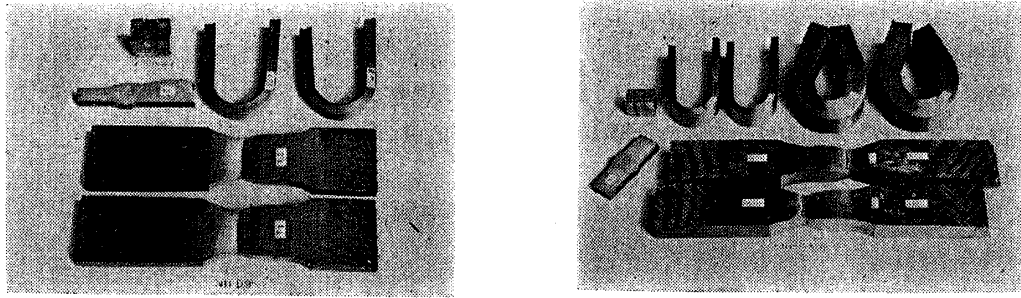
Examples of joint performance test pieces of butt joint in inner hull plates.
